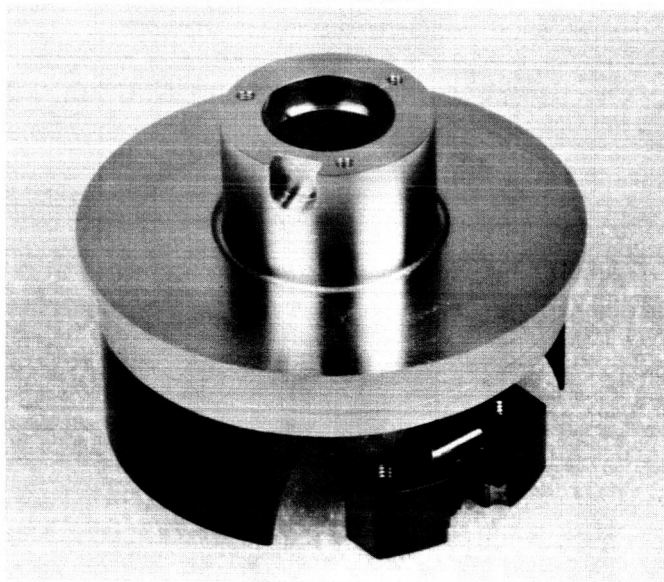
shows one of the final machined inner cylinder covers. Except for the discrepancies previously noted, there were no further problems encountered with these components. They have been forwarded to NASA for the utilization and evaluation.
